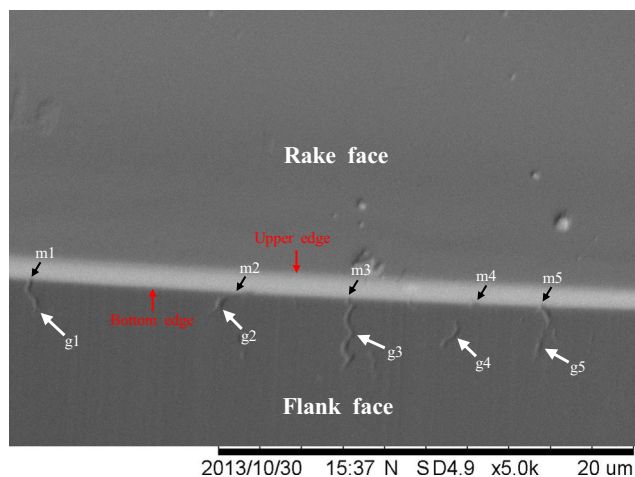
Micro-grooves occurring on the flank face of the cutting tool
